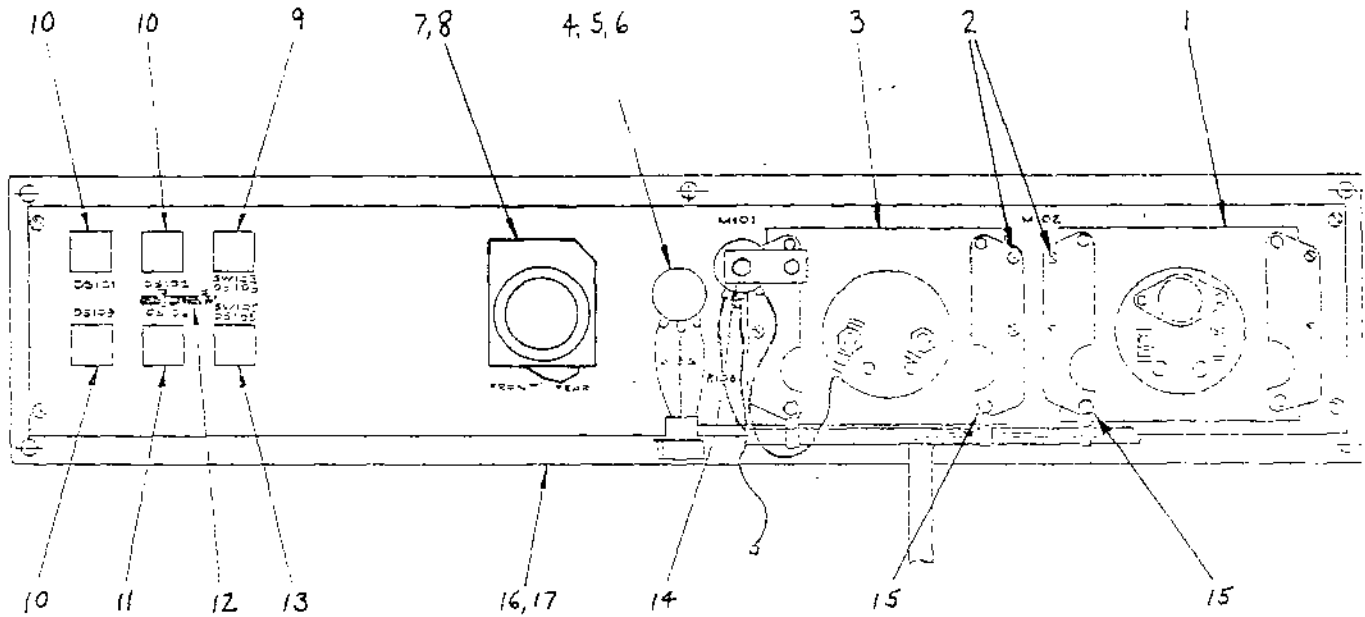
RC-5B PLUS Front Console Panel Assembly (Rear View)
